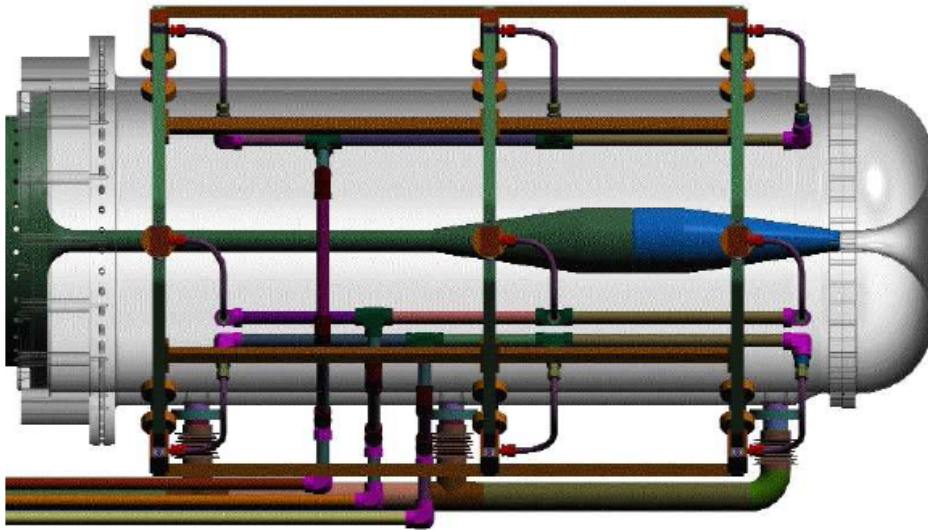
A schematic sketch of the magnetic focusing horn components.
